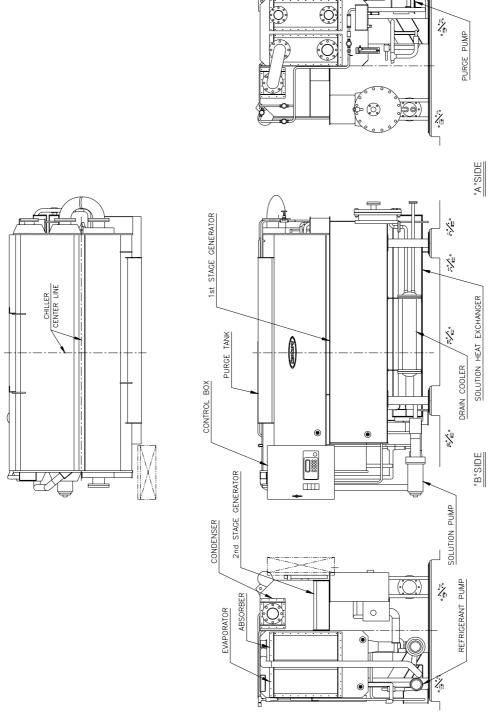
Assembly drawing(AR-W70~200G2)
